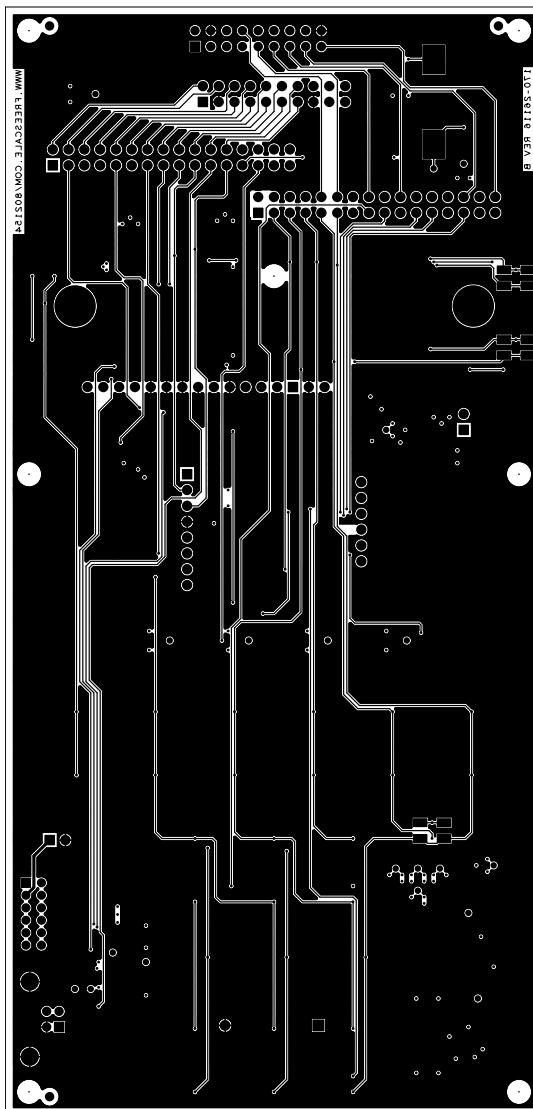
1323x-RCM PCB Layout (Bottom View)
